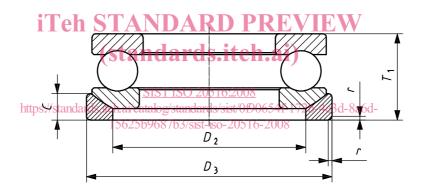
Single-direction aligning thrust ball bearing with aligning seat washer
